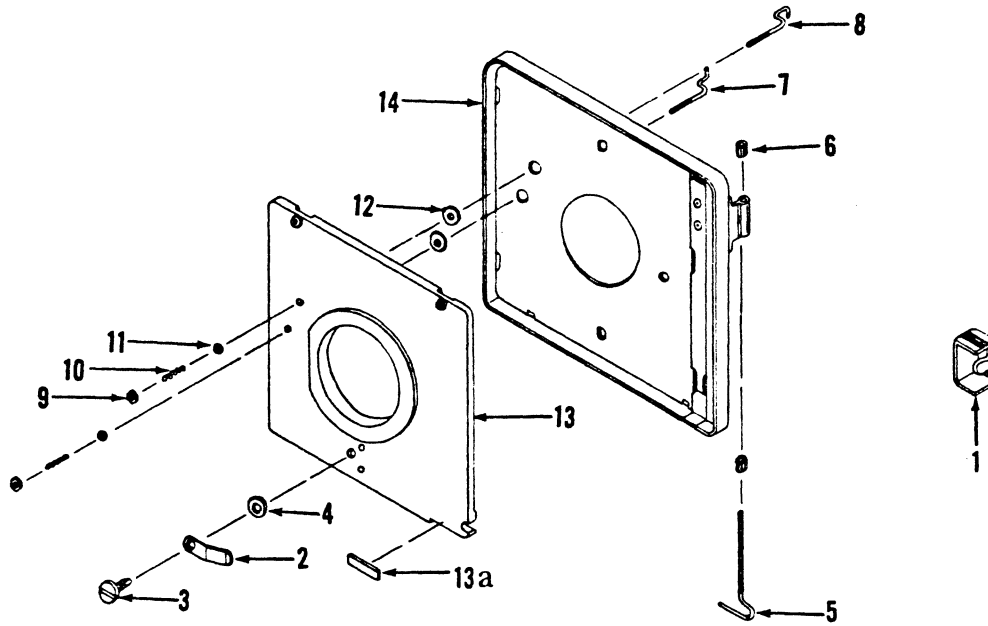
LENSBOARD COMPLETE FOR #2 SUPERMATIC SHUTTER
